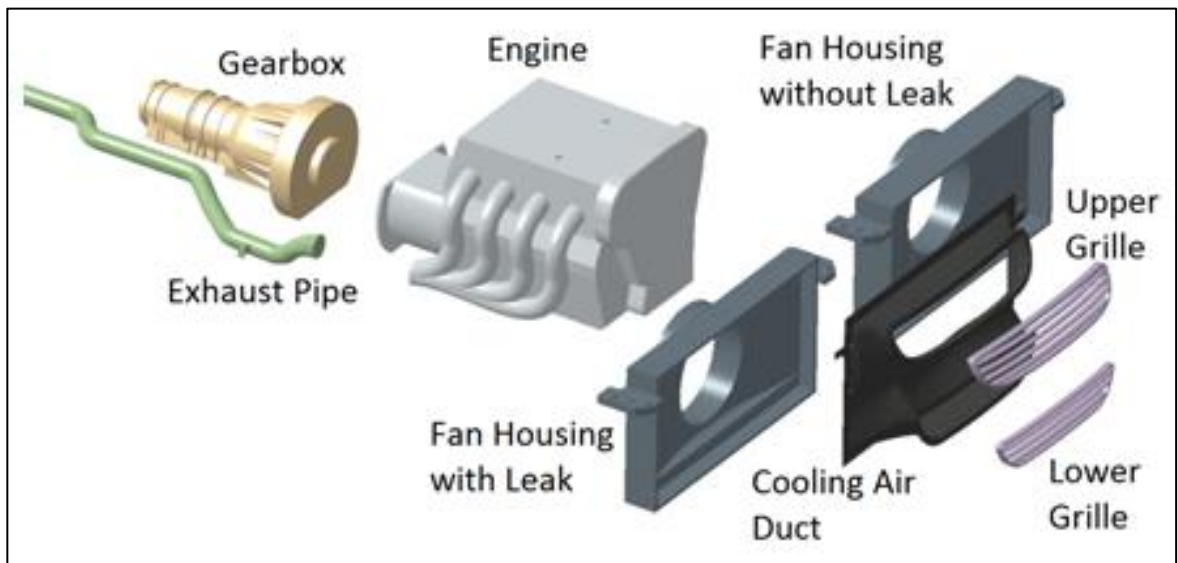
Exploded view of the engine bay flow parts (TUM, 2011)
